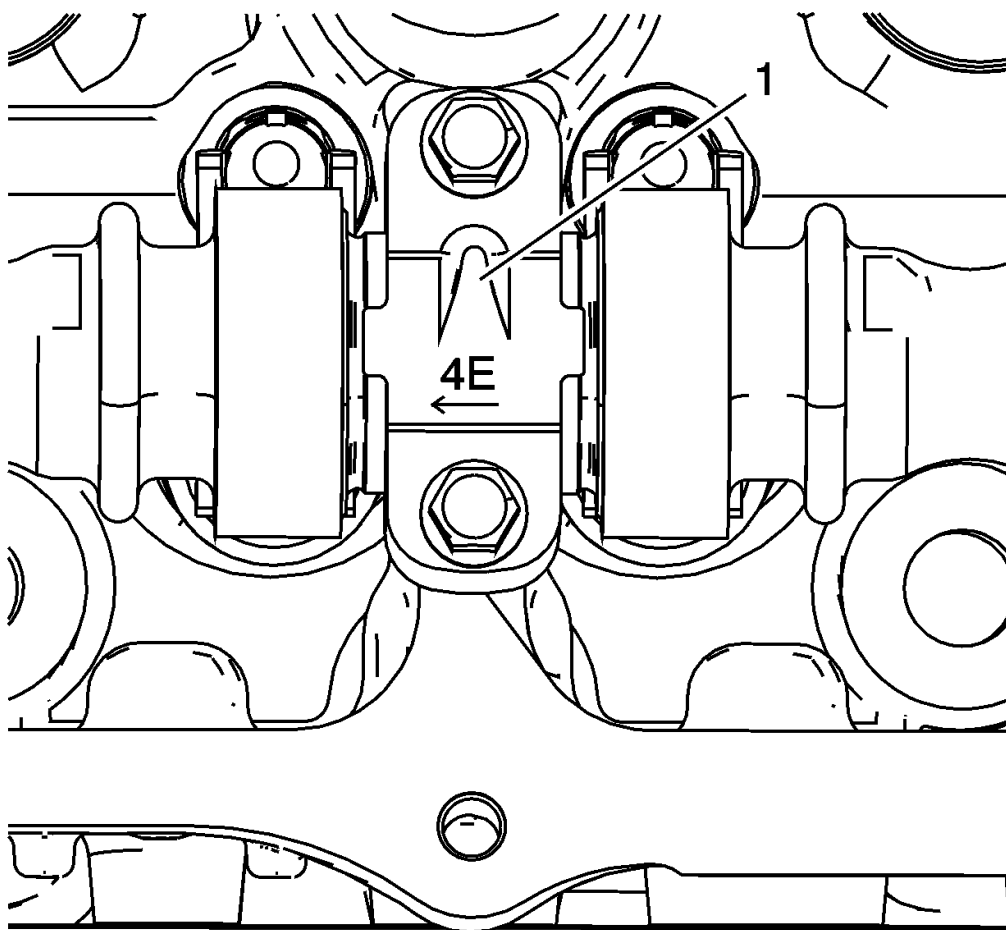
Left Cylinder Head Camshaft Bearing Cap Markings
